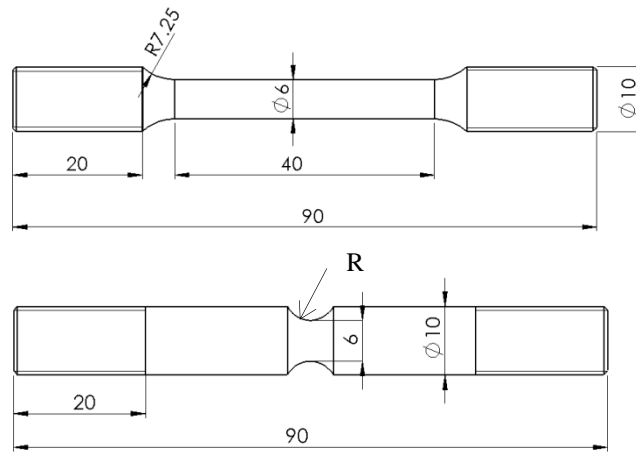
Geometry and dimensions (in mm) of the smooth and pre-notched specimens used in tensile tests
